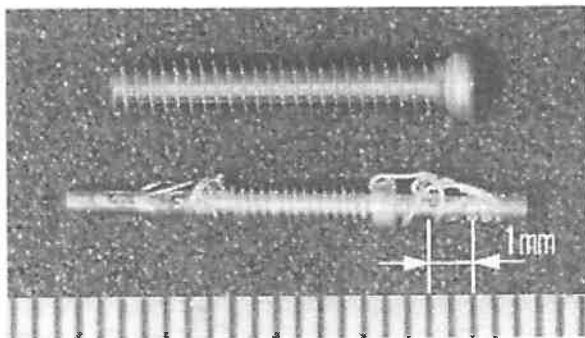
Micro-screw brazed a tinning lead wire and the standardized screw of M1.4.
